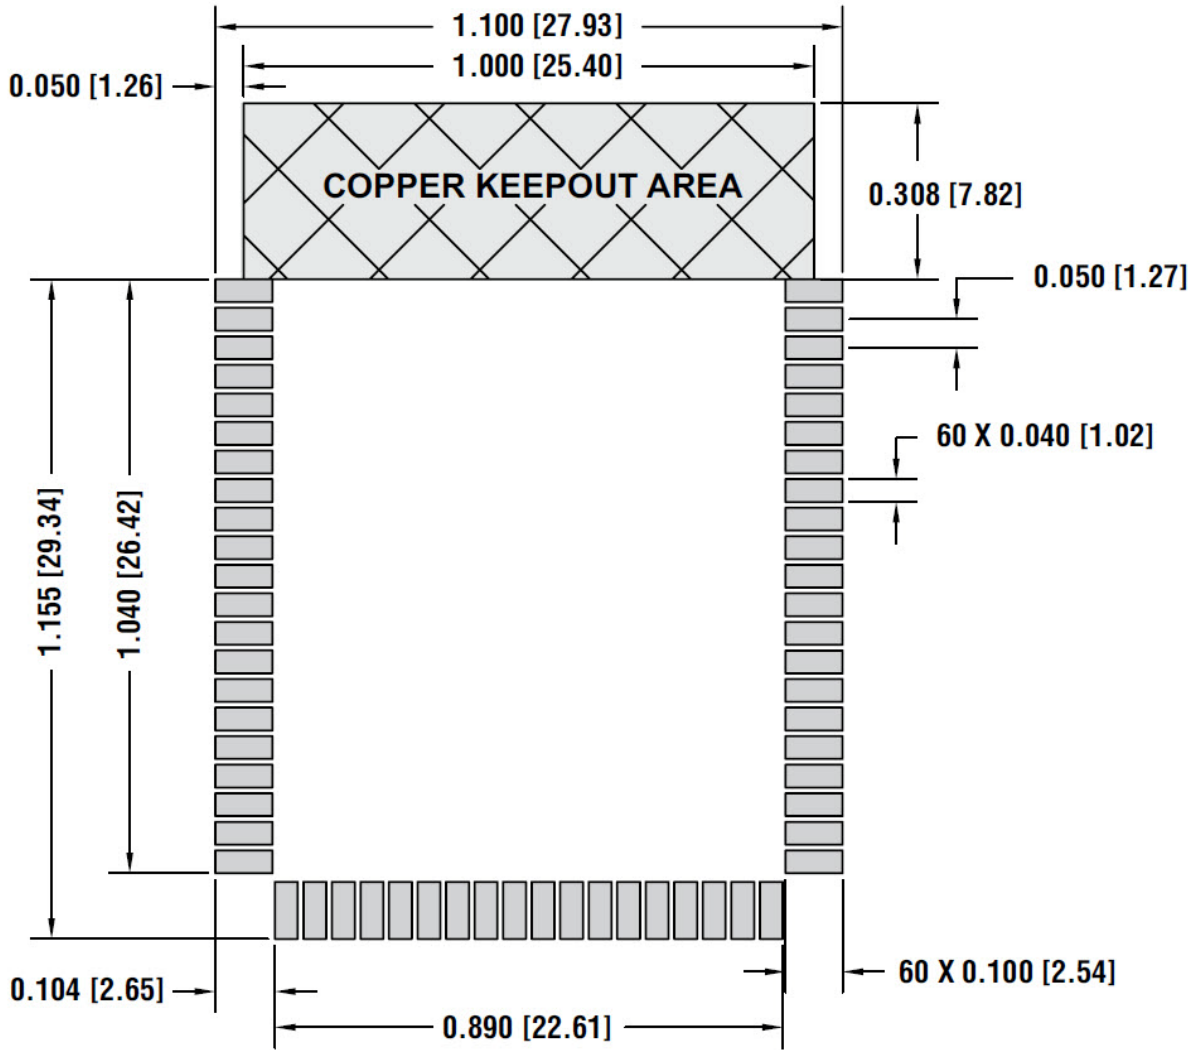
Module Land Footprint for the SM700PC1 Module
